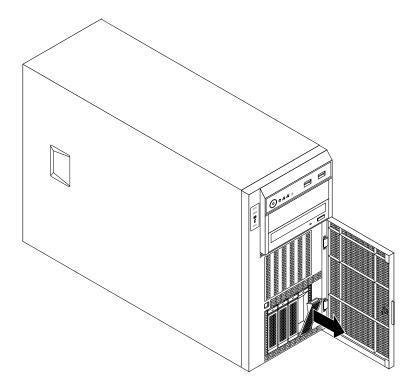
Removing the hot-swap hard disk drive or the dummy tray
